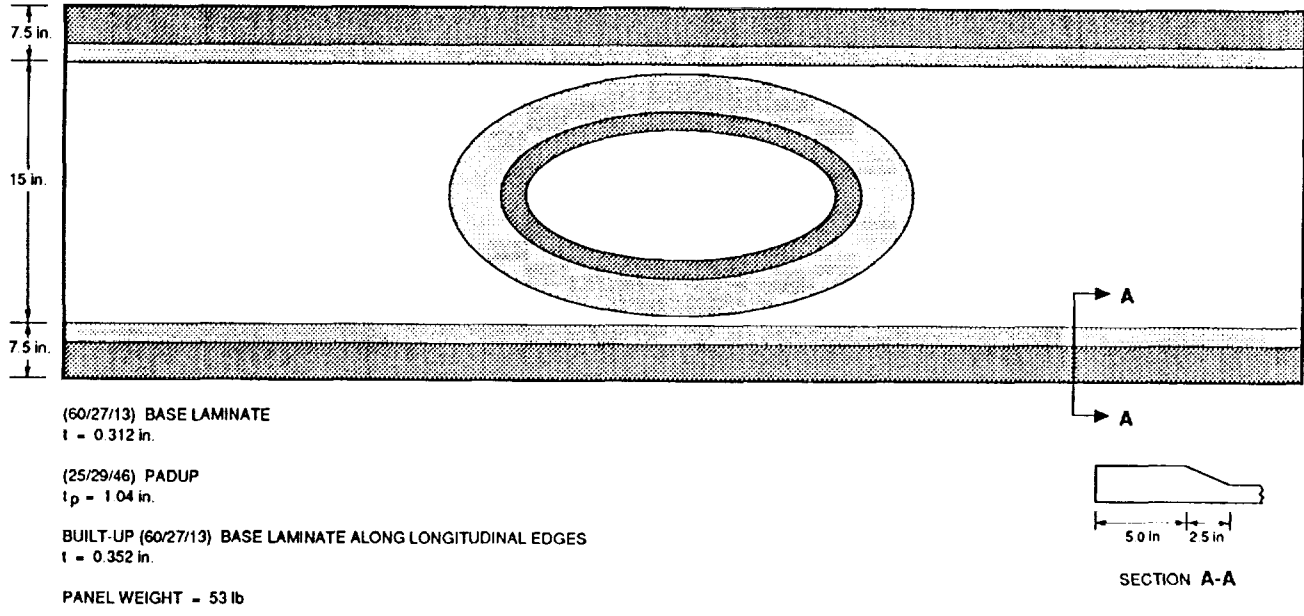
Modified Design for Lower Wing Skin Access Panel.
